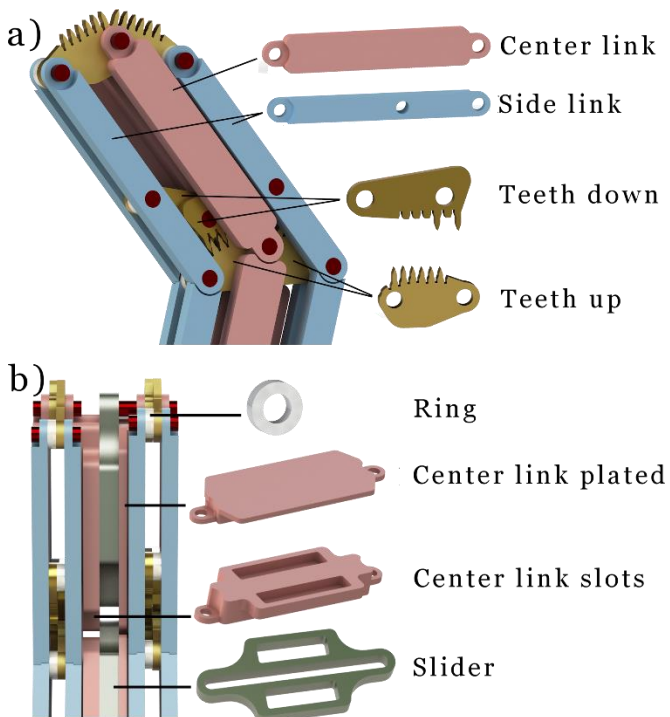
The parts of the Dullomatic. a) Front view of a single memory, indicating the links and teathed parts. b) Side view of the shaft, indicating the parts forming the sliding mechanism.
